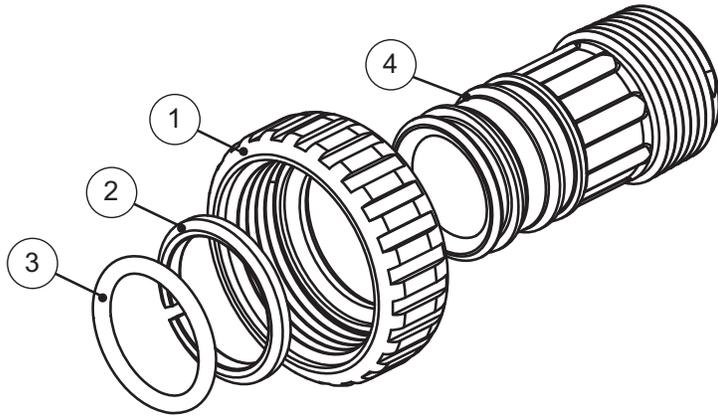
1" PVC Male NPT Assembly - CV3007-04
